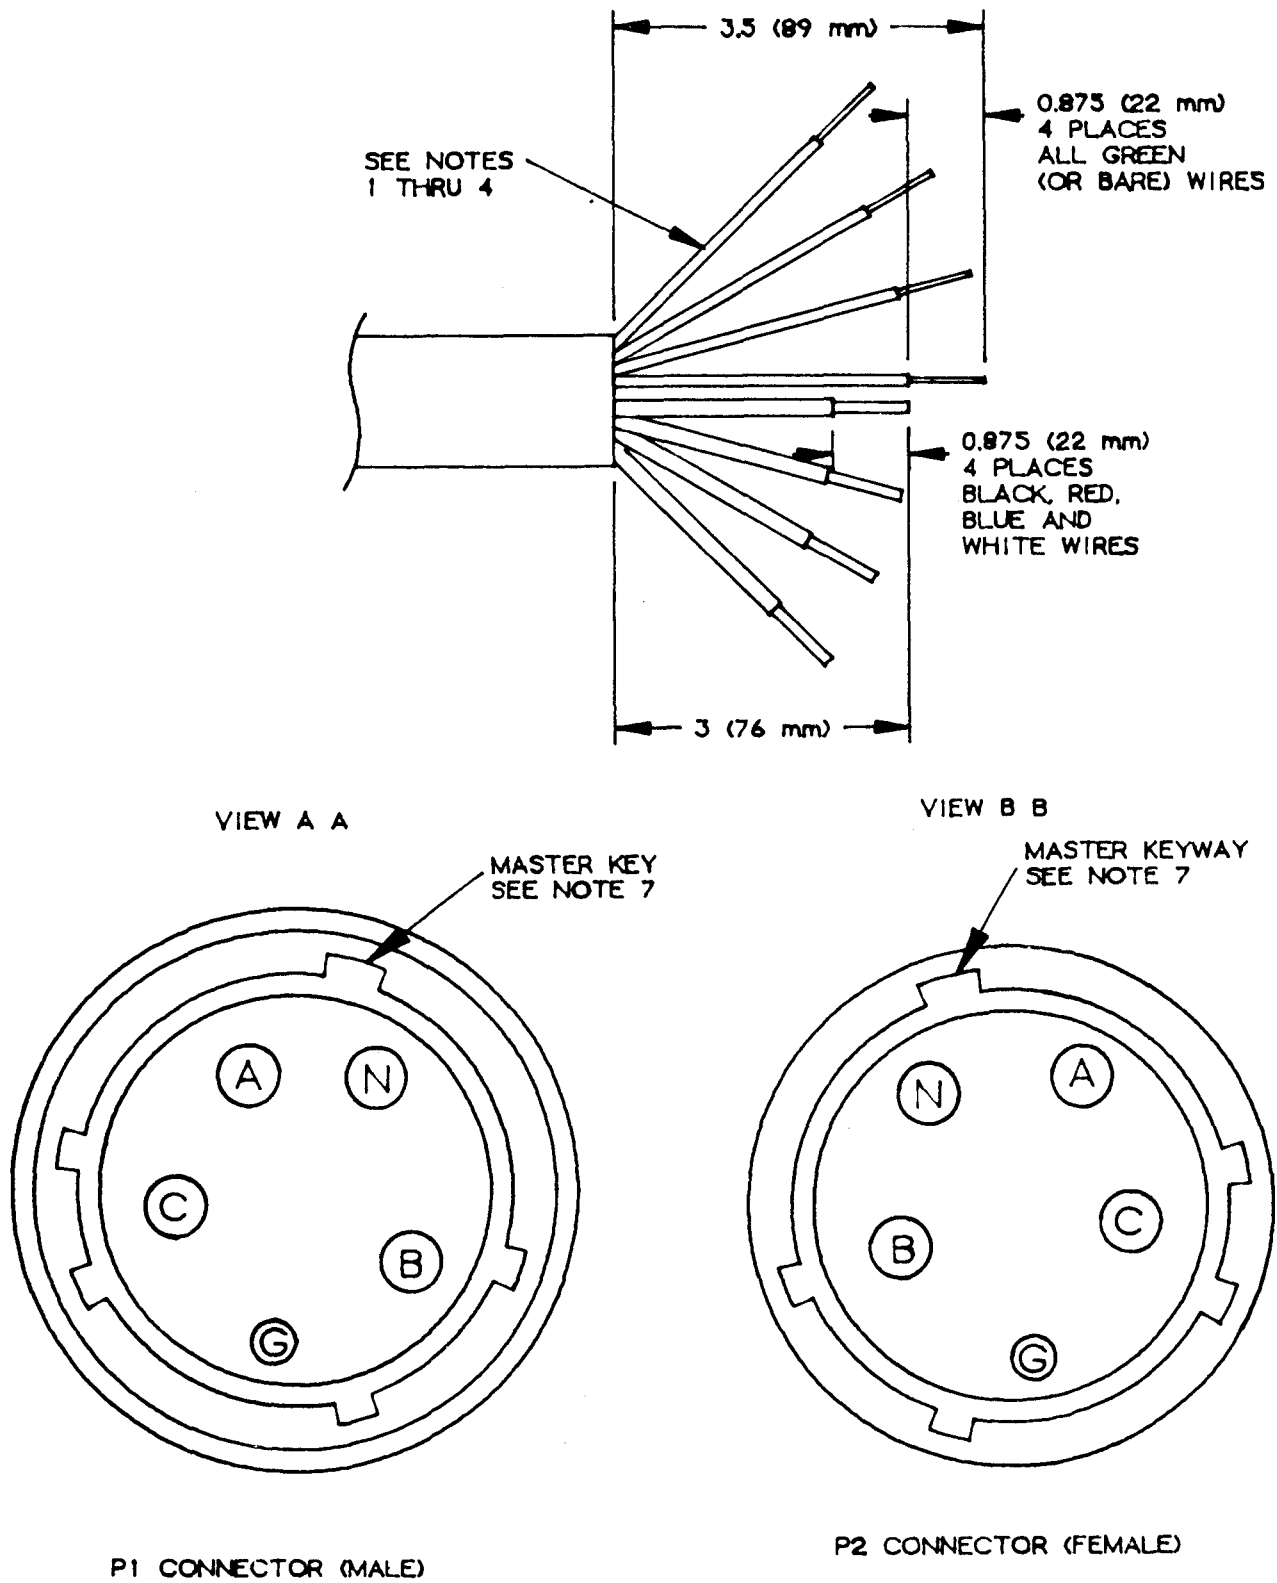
40/60-amp, 50-ft (15.2m) service/feeder cable. (sheet 2 of 3)
